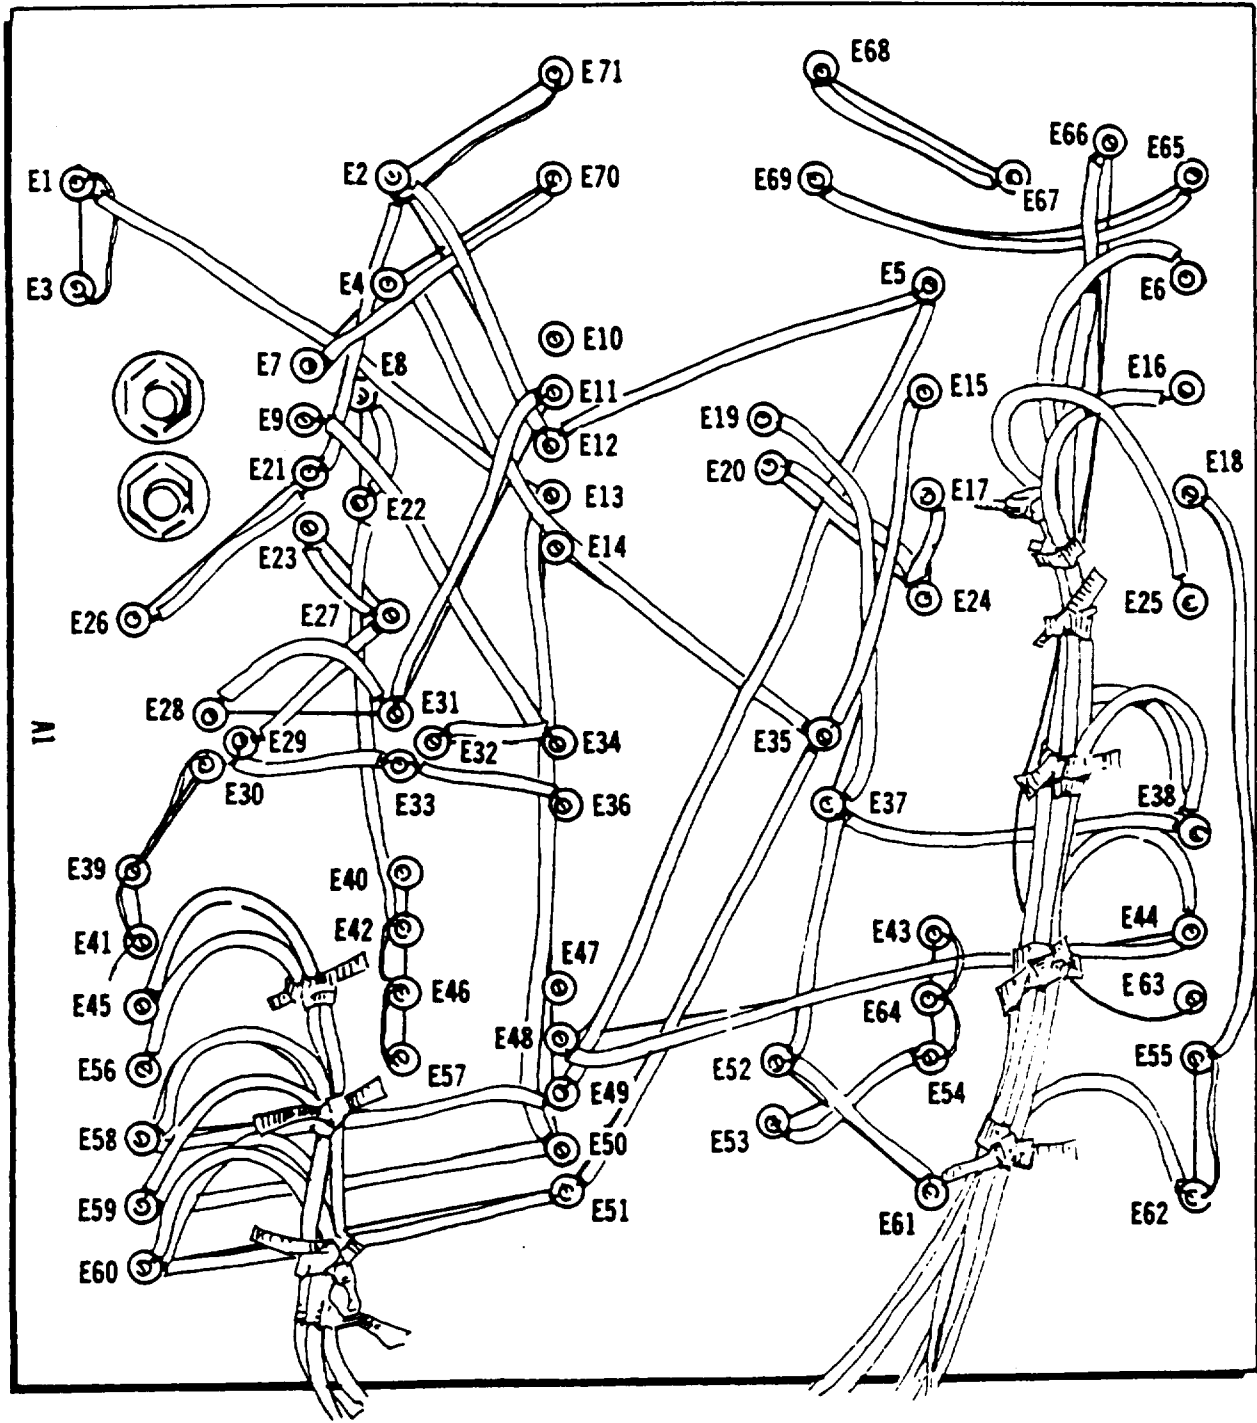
Component Board A-1, Front View (Sheet 1 of 2)
